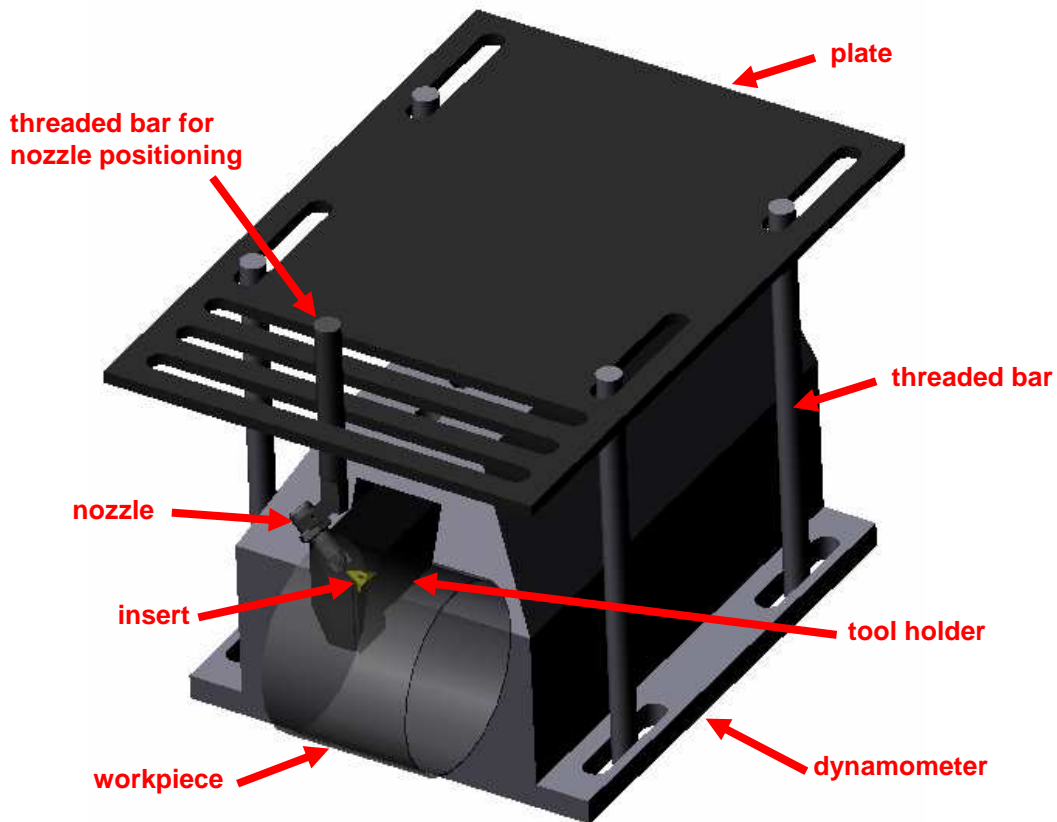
3D sketch showing the workpiece (transparent), the insert and the tool holder, the nozzle and the structure (plate and threaded bars) supporting the nozzle, top mounted on the dynamometer
